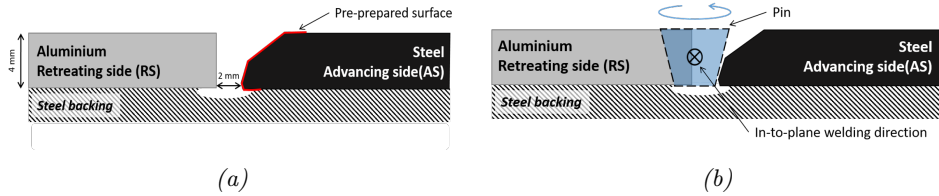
Schematic illustration of the (a) surface preparation and groove configuration prior to the welding operation, and (b) pin-in-groove situation during welding.
